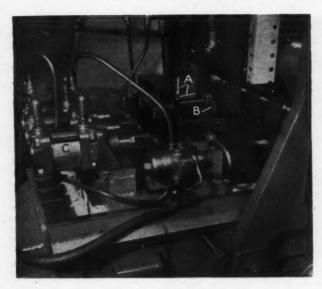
Close-up view of the machine in Fig. 1, showing the toggle-action clamps and the three milling cutters
